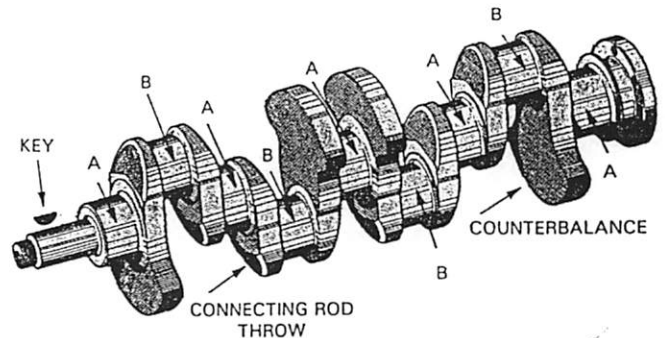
Typical four cylinder engine crankshaft. A—Main bearing journals. B—Rod bearing journals. (Peugeot)
